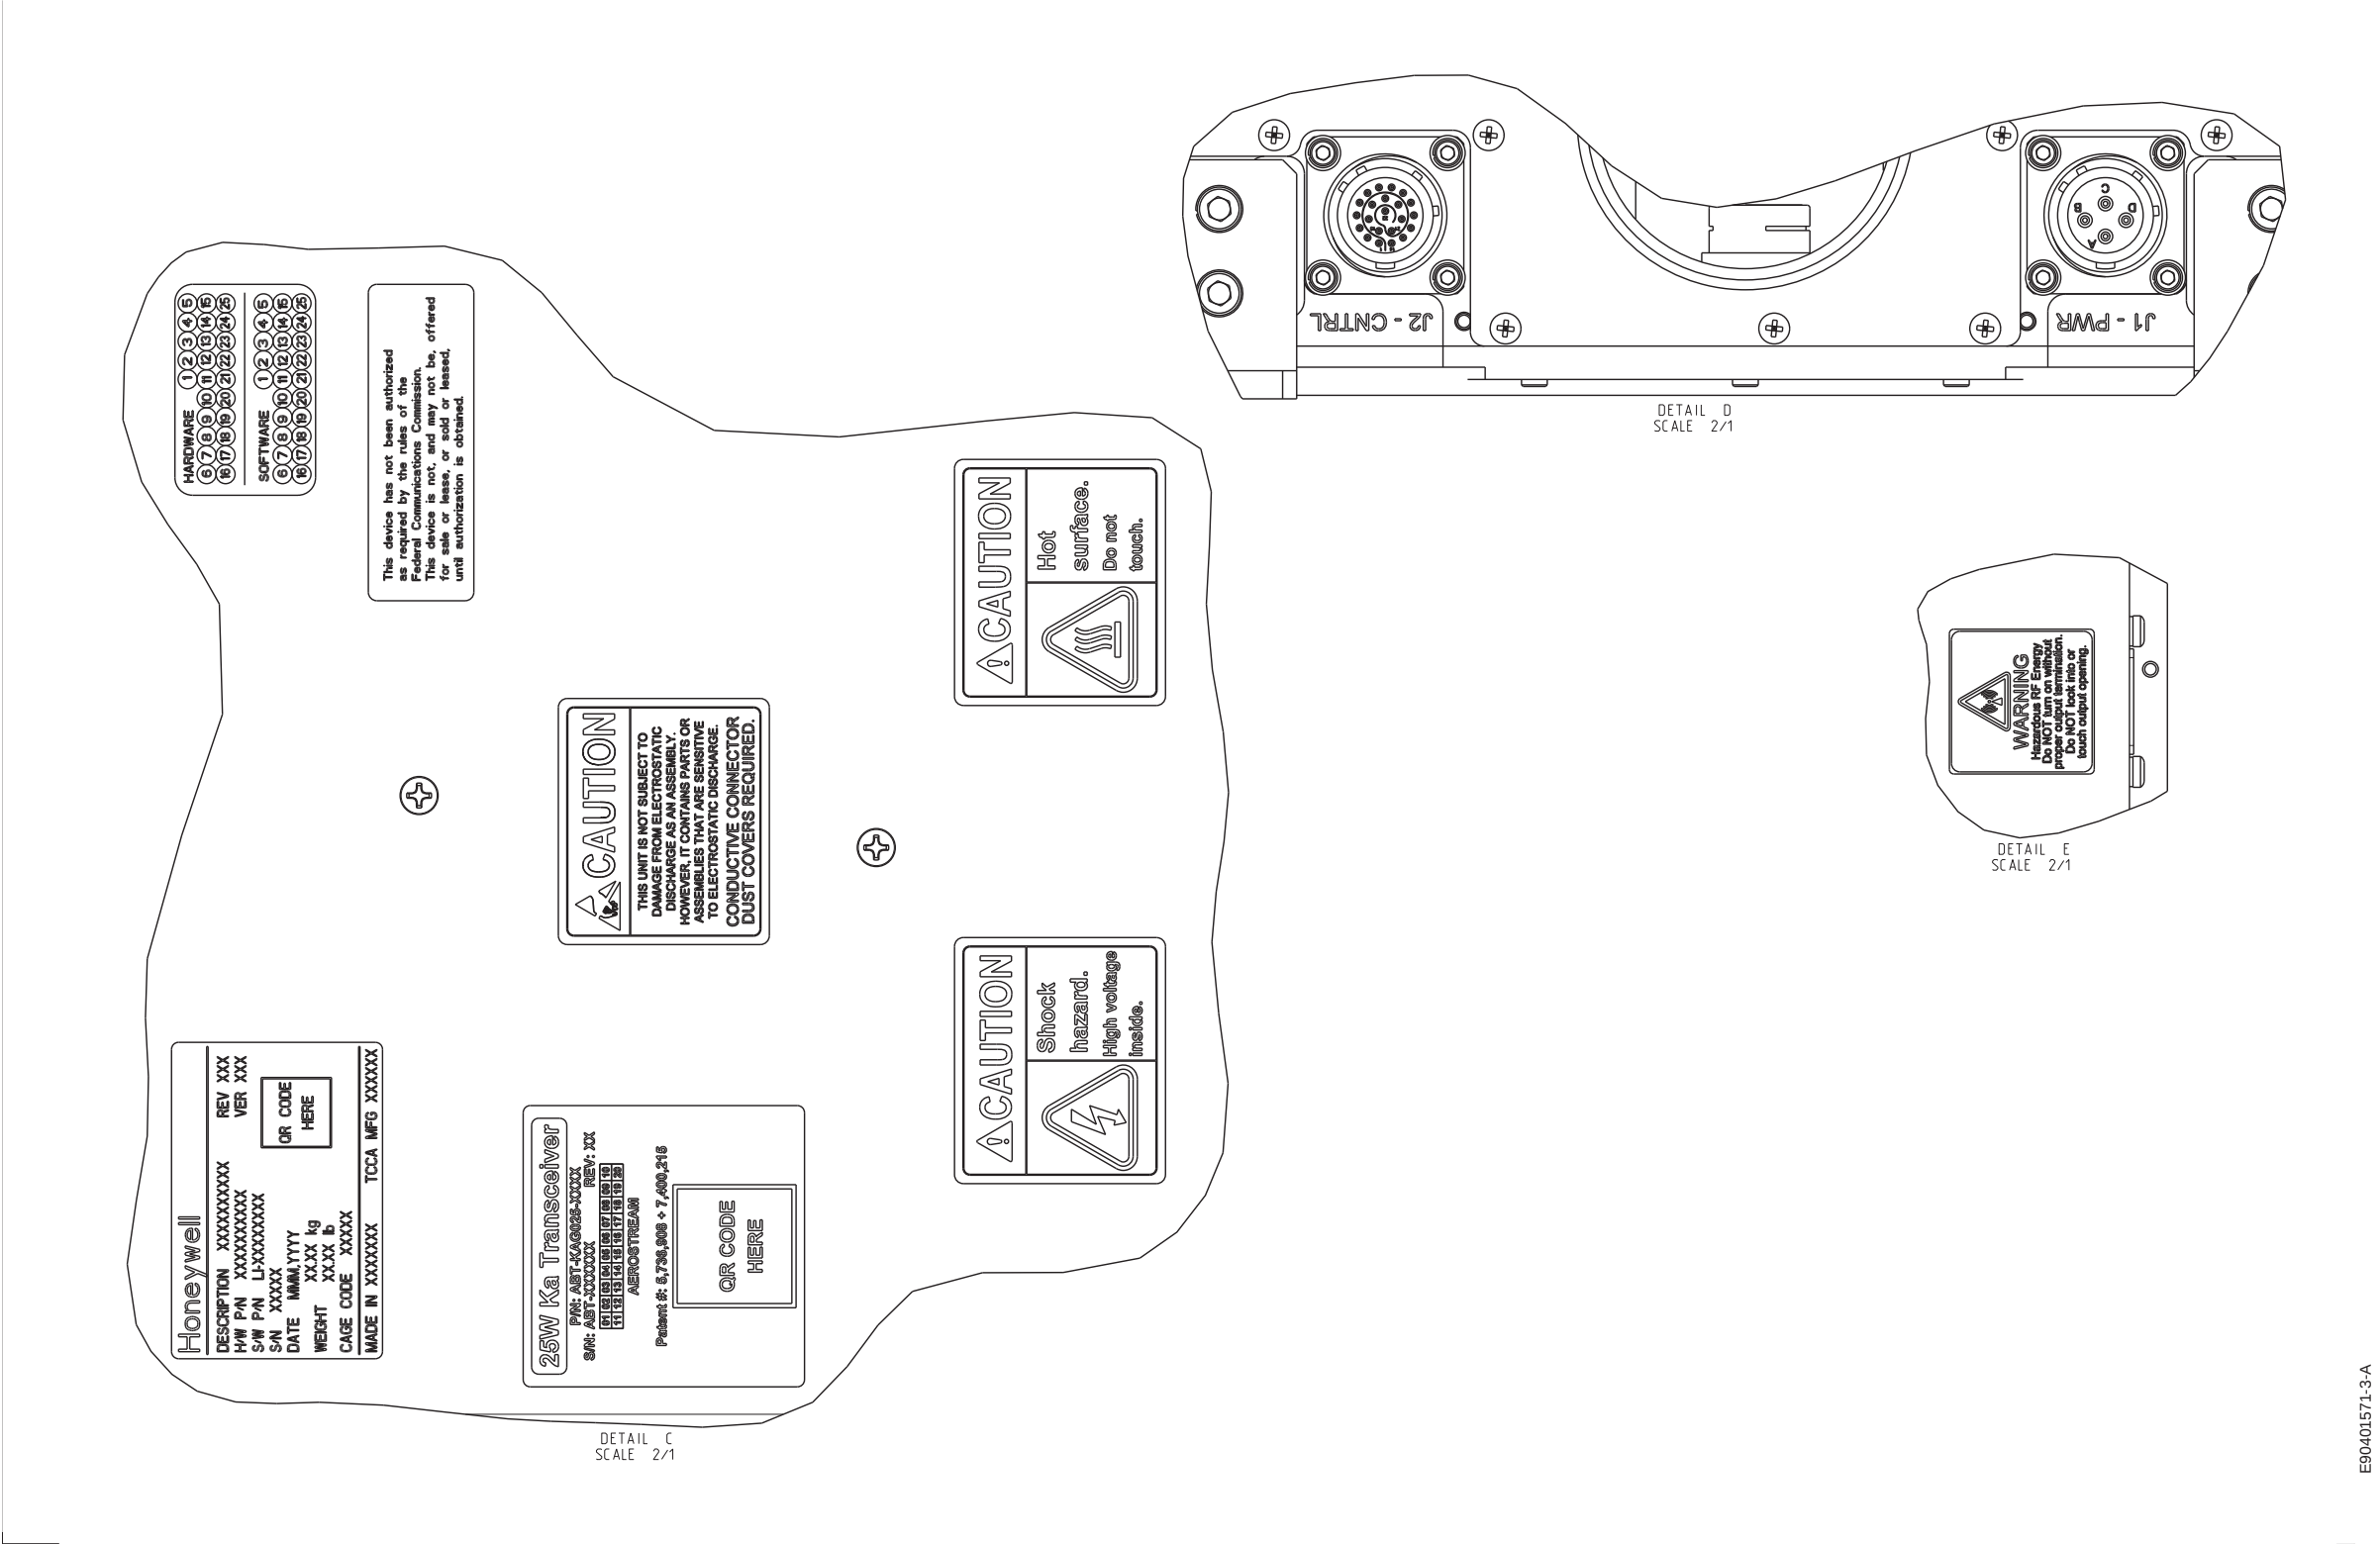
KRFU, Forced Air Cooled, Outline and Installation Drawing (Sheet 3 of 3)
